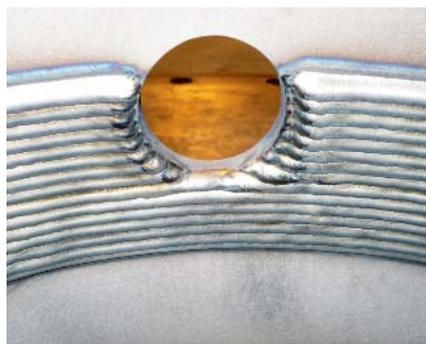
Weld beads on a cylindrical wall, interrupted before a bore and continued on the opposite side.
